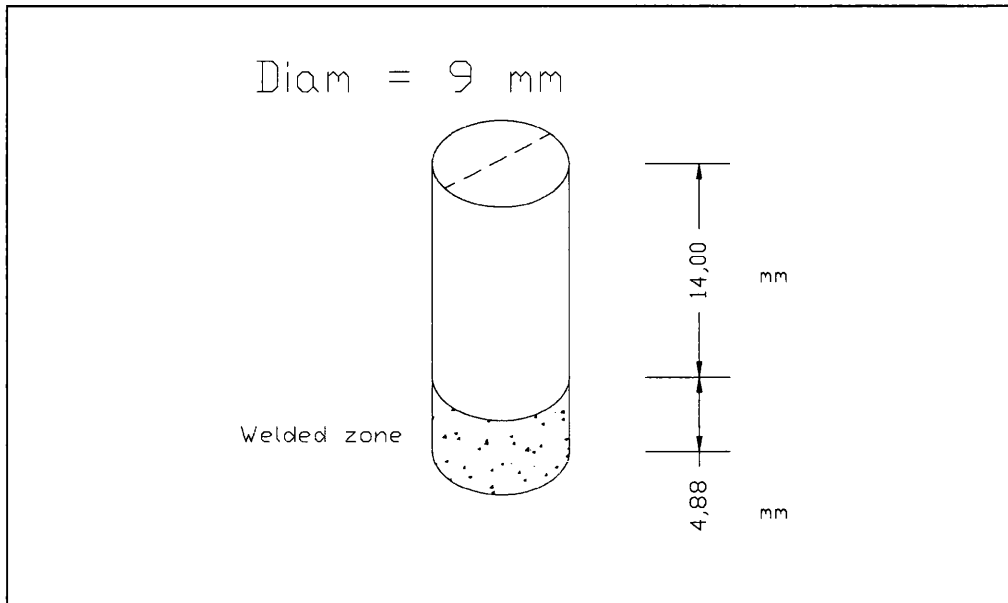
Sketch of the cylinders of type N or P with weldments.
